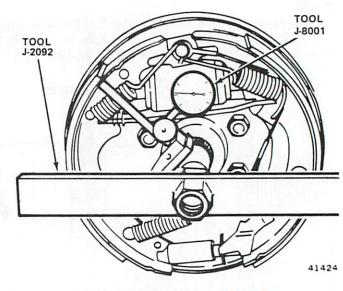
F-23 Measuring Axle Shaft End Play —CJ and Scrambler Models
